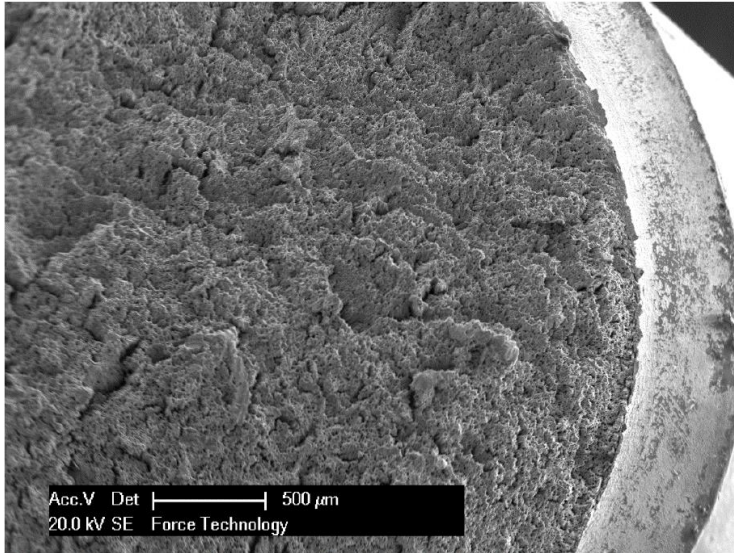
SEM micrograph of aft right hand steering rod fracture surface.
